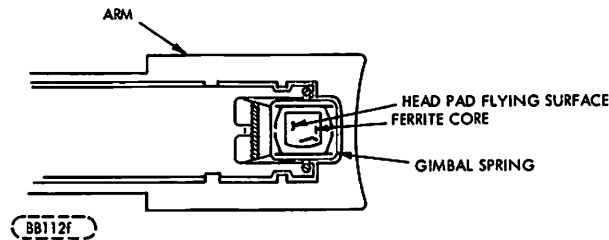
TYPICAL HEAD/ARM COMPONENTS
